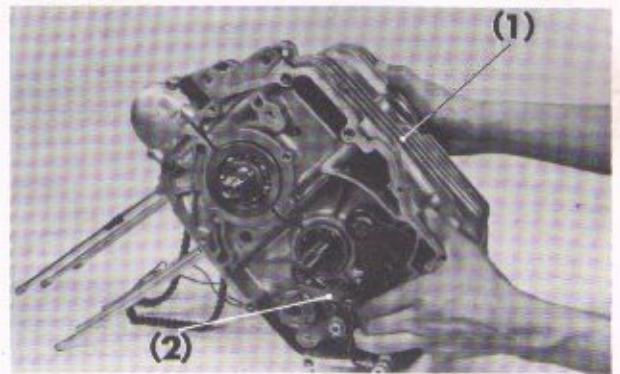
(1) Lower crankcase (2) Gear shift arm
